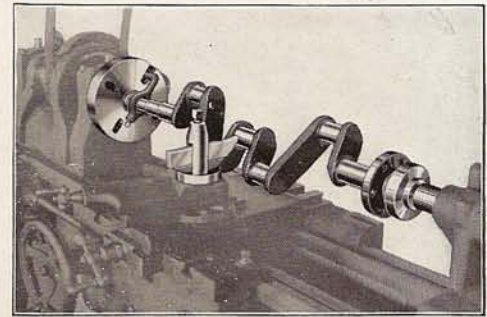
Truing Main Bearings of Crankshaft Using a Straight Turning Tool.
